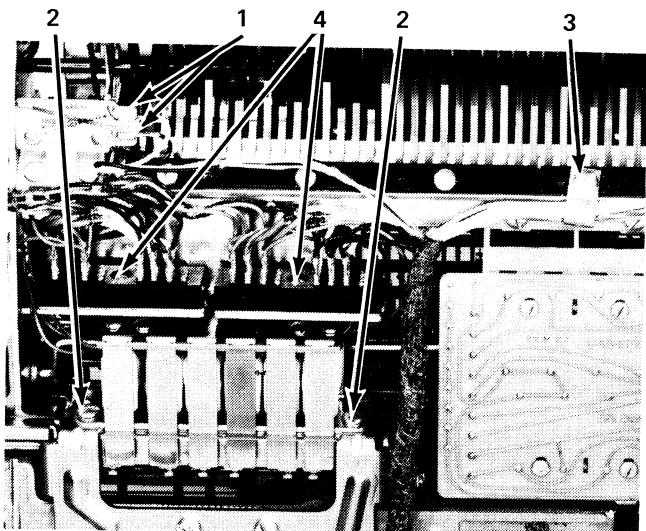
Keyboard Removal (Bottom of Keyboard)
